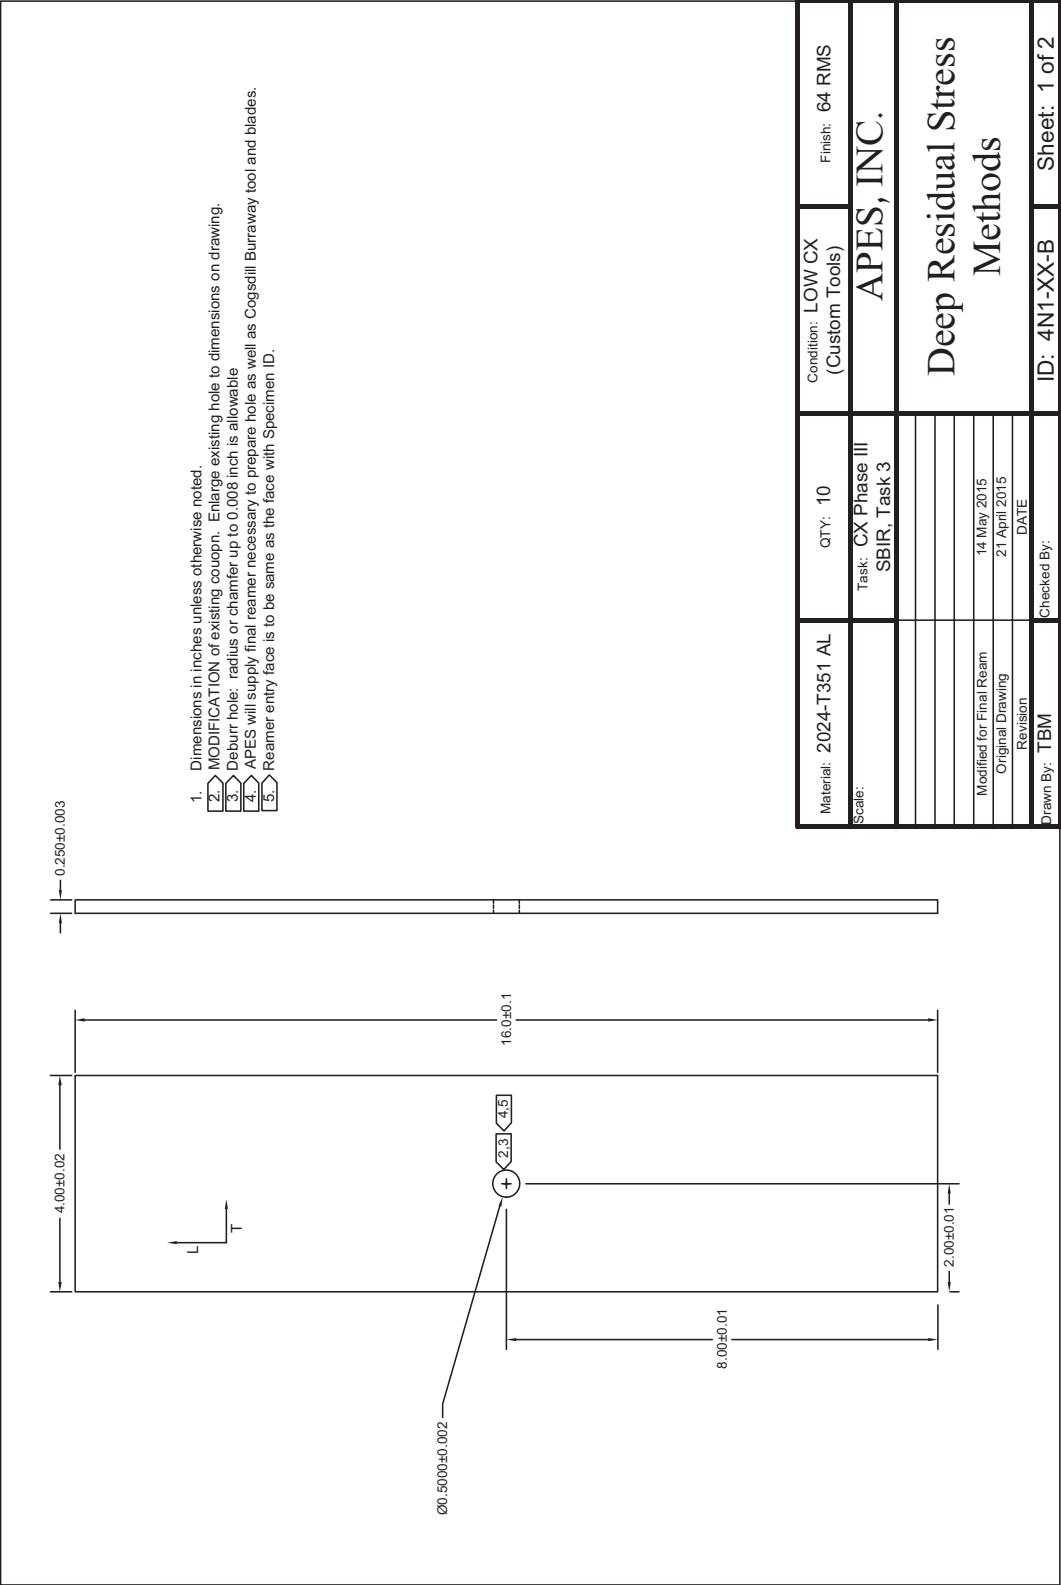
Manufacturing Drawing for Cx4N1-XX-B (2024-T351) Coupons Defining Final Ream Diameter and Deburring Process.
